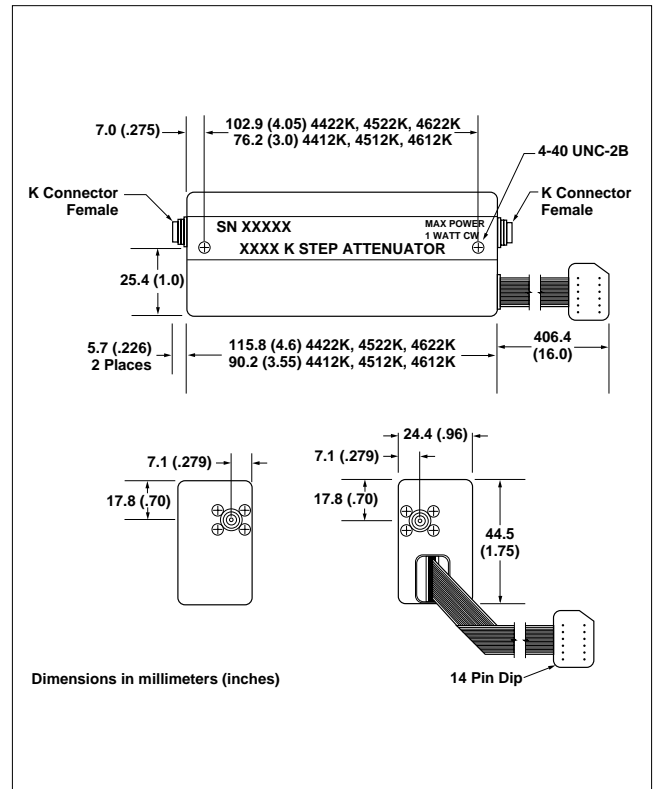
Outline Drawing of 44XXX, 45XXX, and 46XXX Step Attenuators
